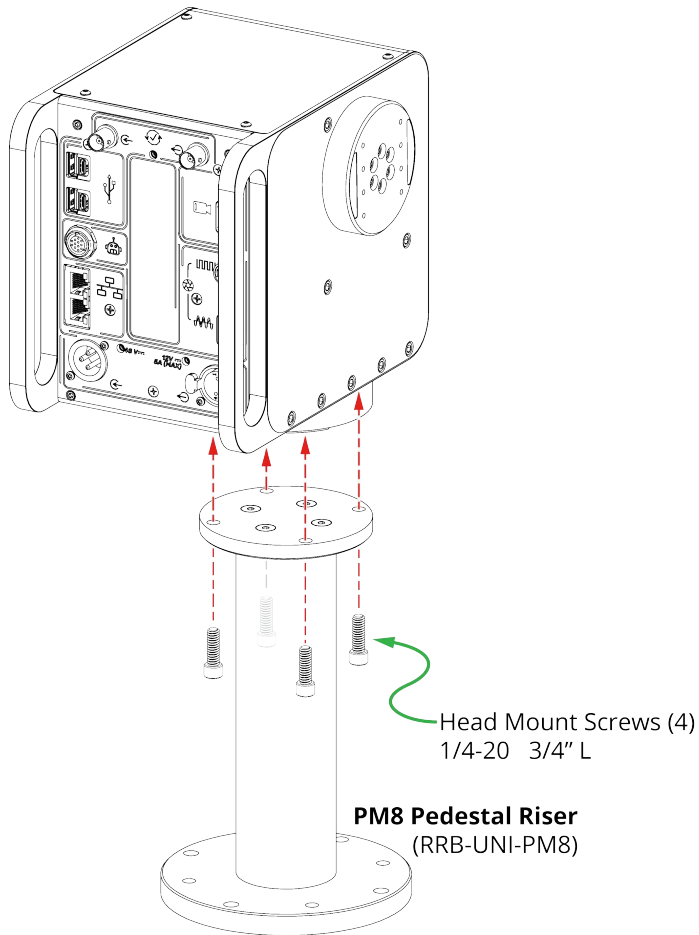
Mounting an X350 Head on a PM8 Pedestal Riser
